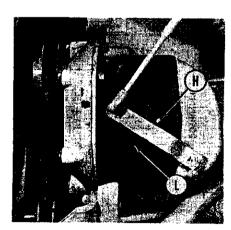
Series B-414 and 354 non-diesel governor which mounts on left side of engine is shown with side cover off. Note high idle (H) and low idle (L) adjusting screws.
